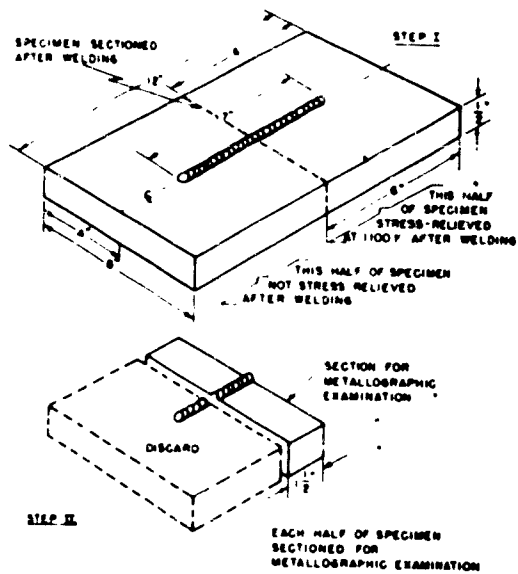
Details of Preparation Bead-Welded Specimen
